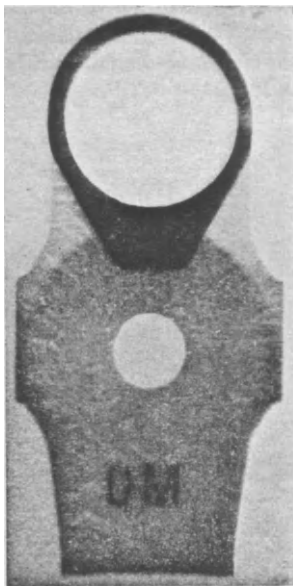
Severe pinhole porosity shown in the X-ray photograph.
